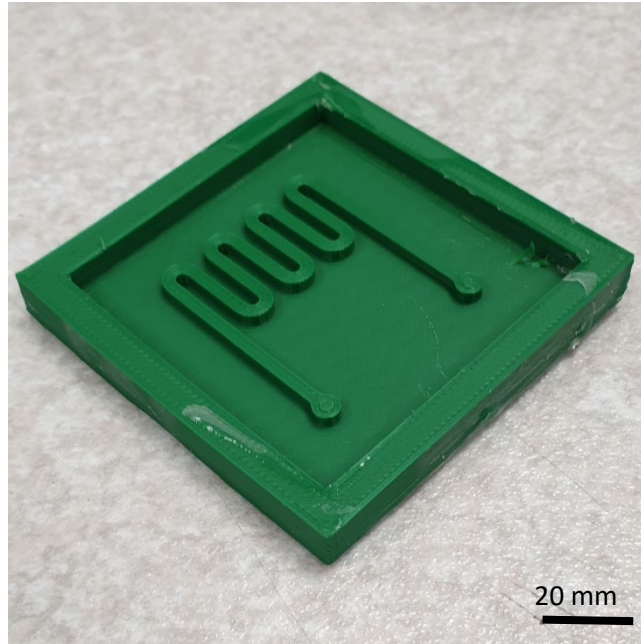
Photograph of the final design used for the 3D printed mould. Note the rough face at the base of the mould due to the nozzle size of the 3D printer. This roughness limited which bonding methods were appropriate.
